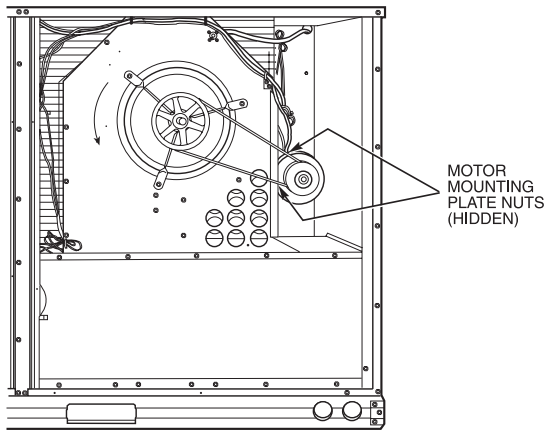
Typical Belt-Drive Motor Mounting for Sizes 120-151
